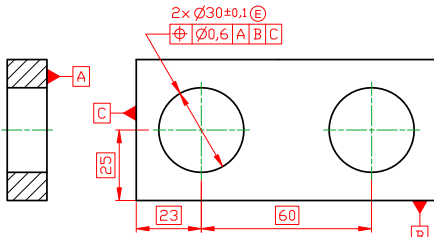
The position tolerance specification for two hole pattern.
